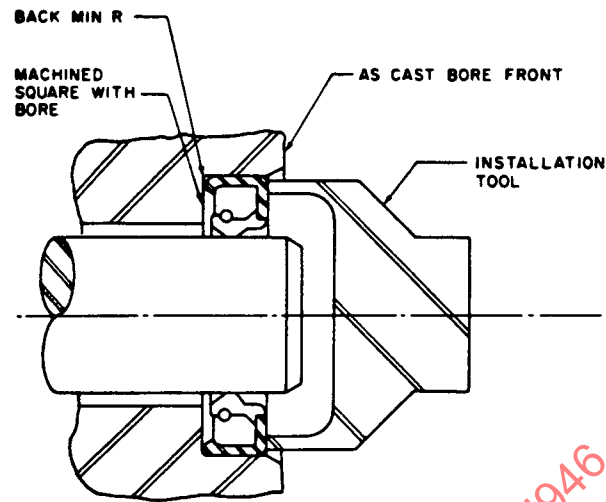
Bottom Bore: Seal Bottoms on Machine Bore Shoulder
